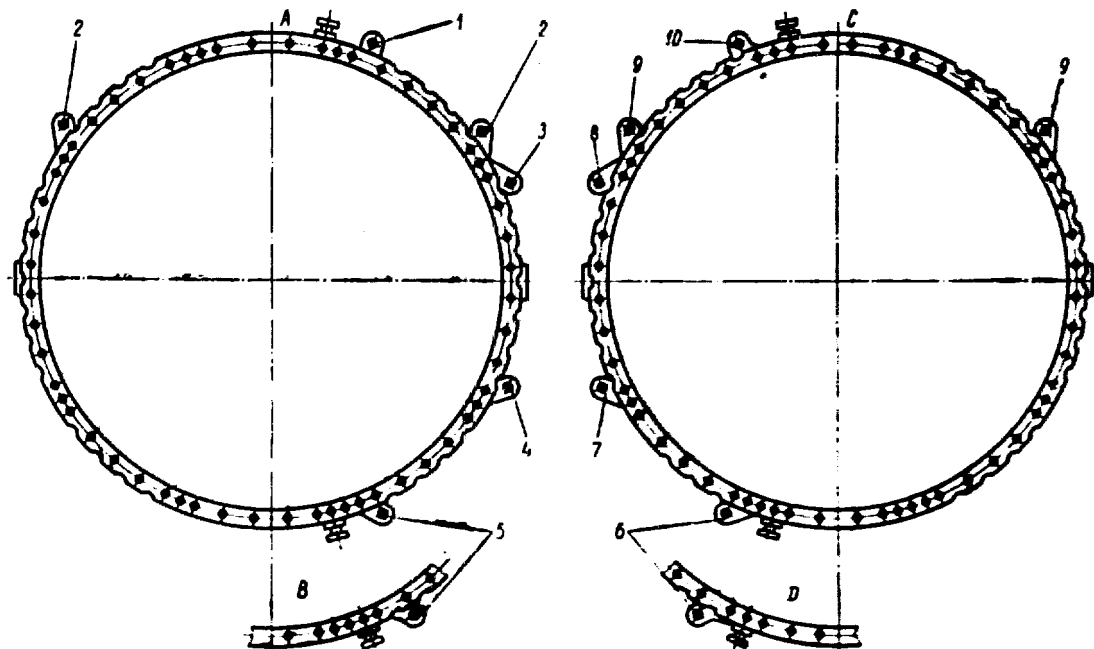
Rear Casing Ring with Engine Attachment Fittings (Viewed from Exhaust Unit):
